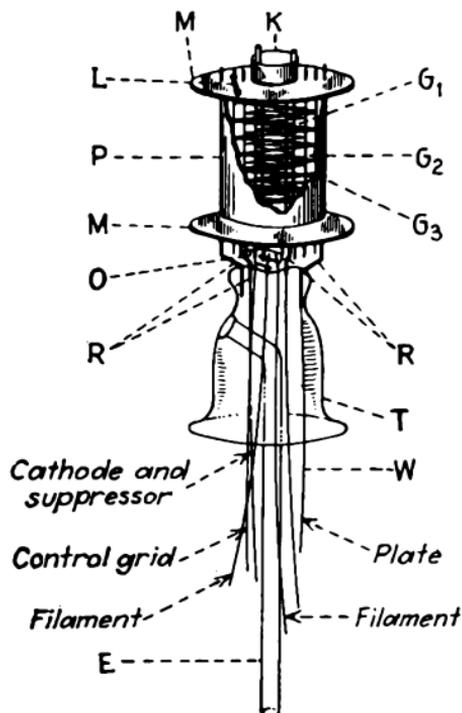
Assembly of grids, plate, mica disks, cathode heater cylinders, and heat radiator.
